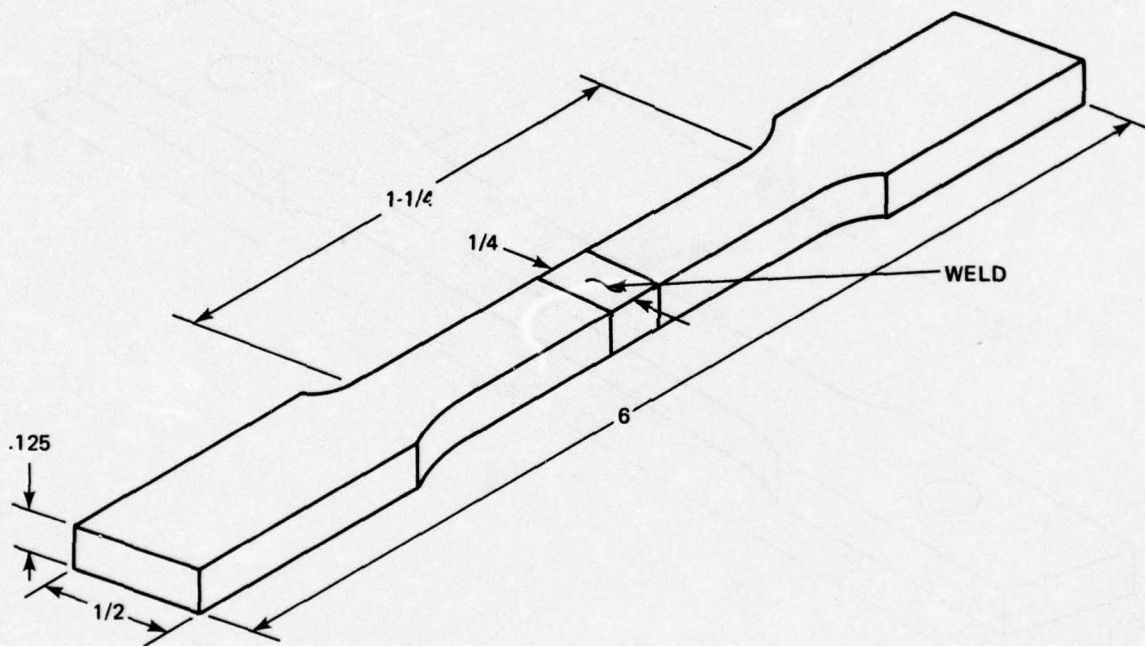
Transverse Weld Tensile Coupon (TGS 5350)
